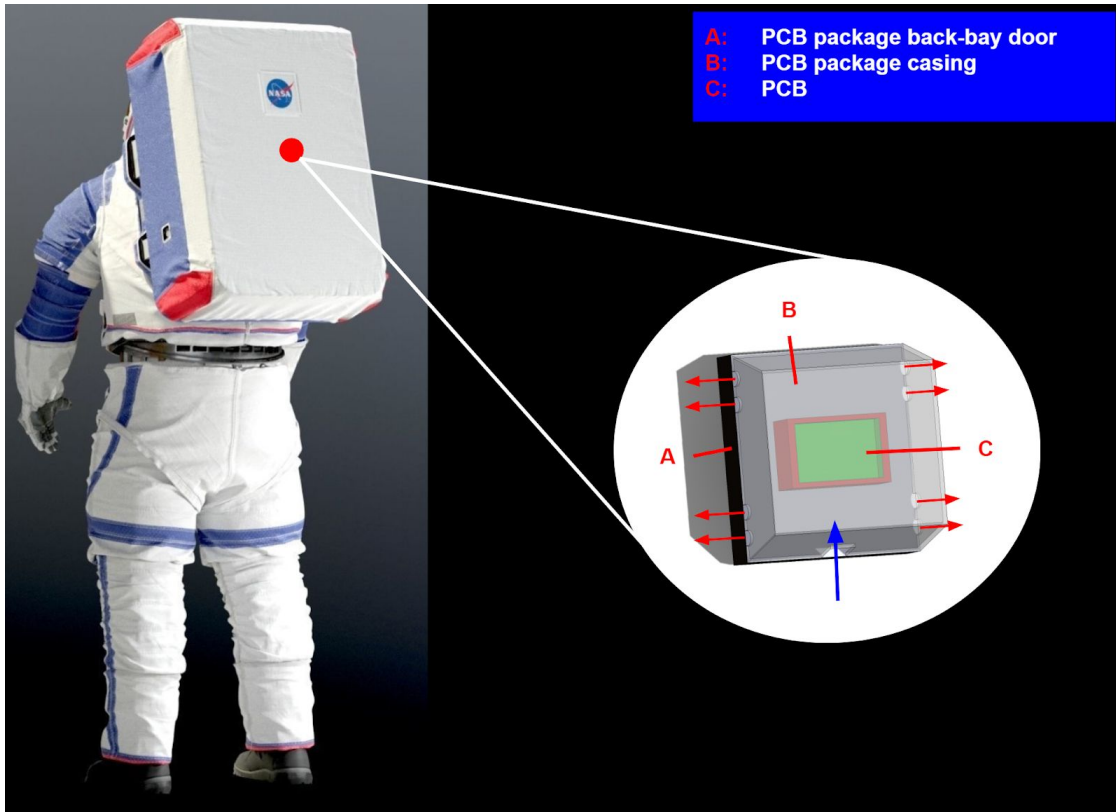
Schematic depicting electronic PCB packaging mechanism. Red arrows represent wires connecting PCB output to EDS sleeve rails. Blue arrow represents power input from the spacesuit battery.
